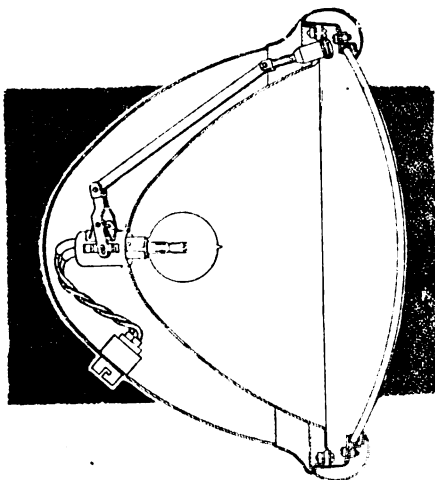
Gray & Davis electric headlight, showing bulb focusing mechanism
